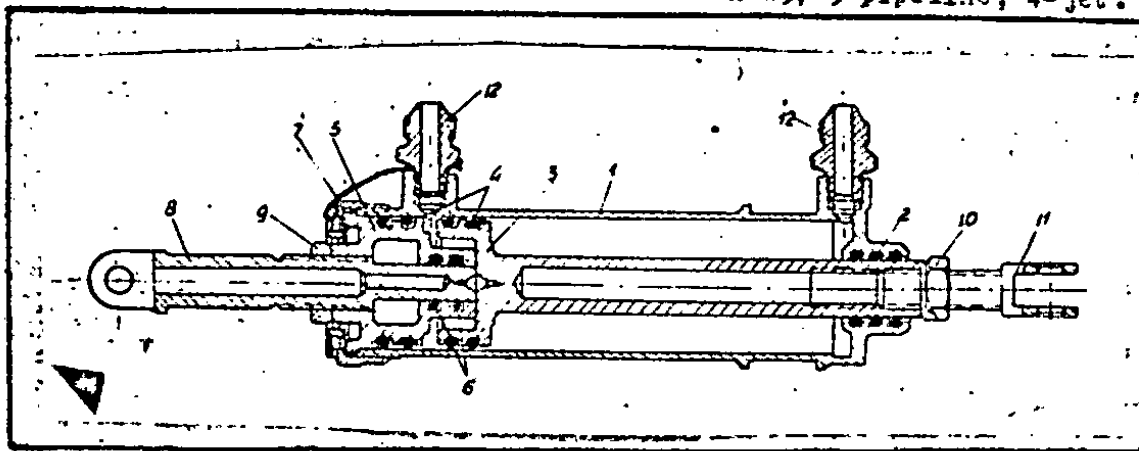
Power Jack. 1-body, 2-rubber sealing of rod, 3-piston with rod, 4-rubber sealing of piston and plug, 5-plug, 6-rubber sealing of front fork, 7-nut, 8-front fork, 9-10 lock nuts, 11-rear fork, 12-necks.
